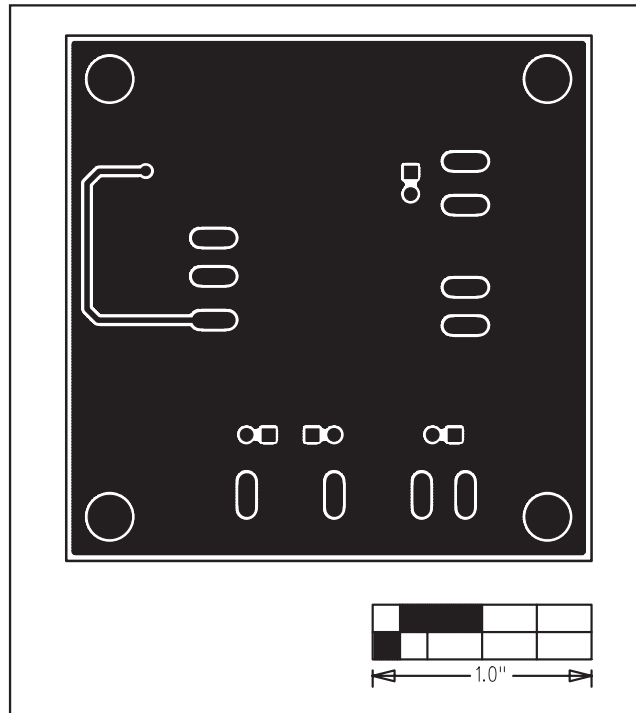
MAX14529E EV Kit PCB Layout—Solder Side
